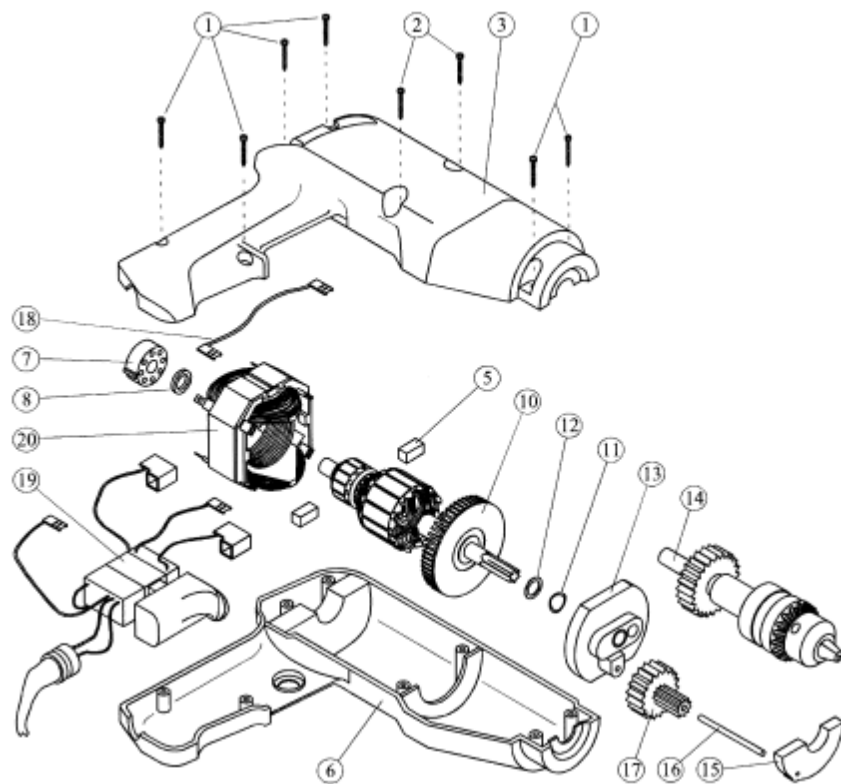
The exploded view of disassembled electric drill (adopted from: Kroll and Carver [115])
